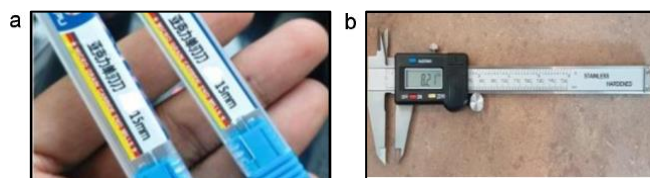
(a) Endmill; (b) Vernier Caliper.
